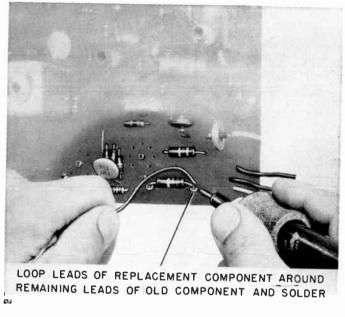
Soldering replacement resistor in place. (Admiral Corp.)
